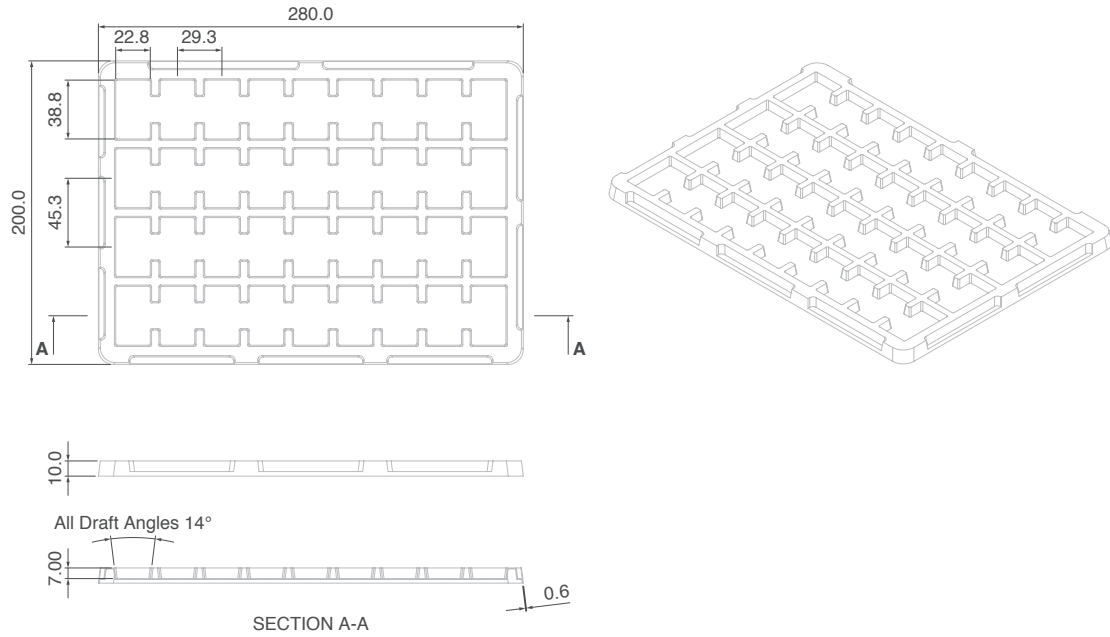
STANDARD PACKING BOX DIMENSIONS
